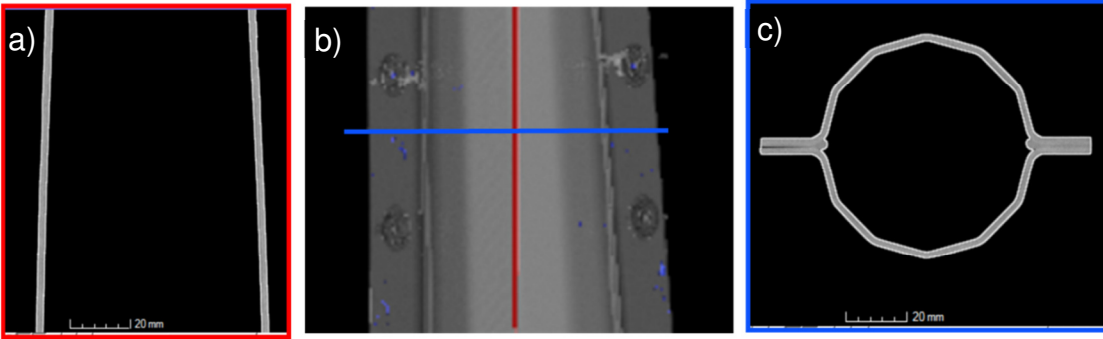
CT inspection of bonded crush can sections. a) vertical cut, b) perspective surface view showing location of cross-sections, c) cross-cut.
